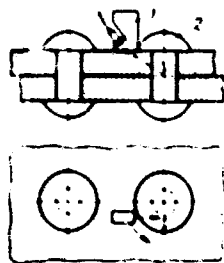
Ultrasonic inspection of a riveted joint. 1) Search unit; 2) rivet.
